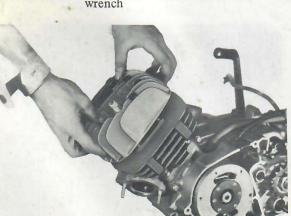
Taking off cylinder head and cylinder head gasket
